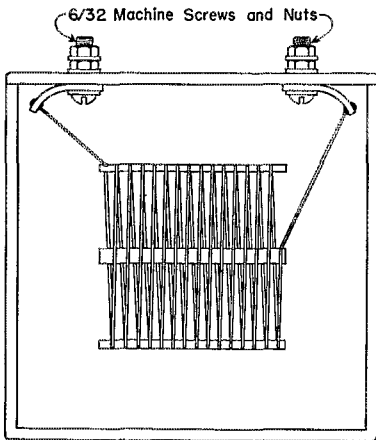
B & W Miniductor mounted in a transparent parts container.
